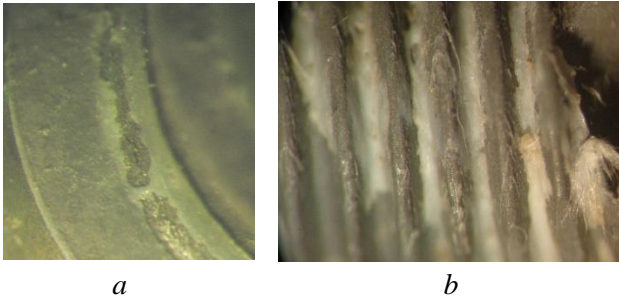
View thread: *a* – multiple cracks internal thread ($\times 4$ zoom 2); *b* – the sample surface the thread 2 ($\times 4$ zoom 2)
